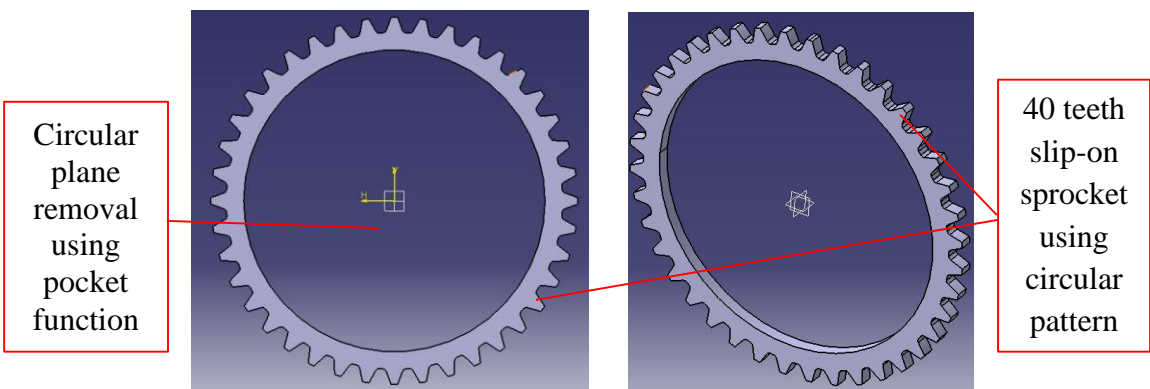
A complete 40 teeth slip-on sprocket 2D and 3D drawings by using circular pattern function
